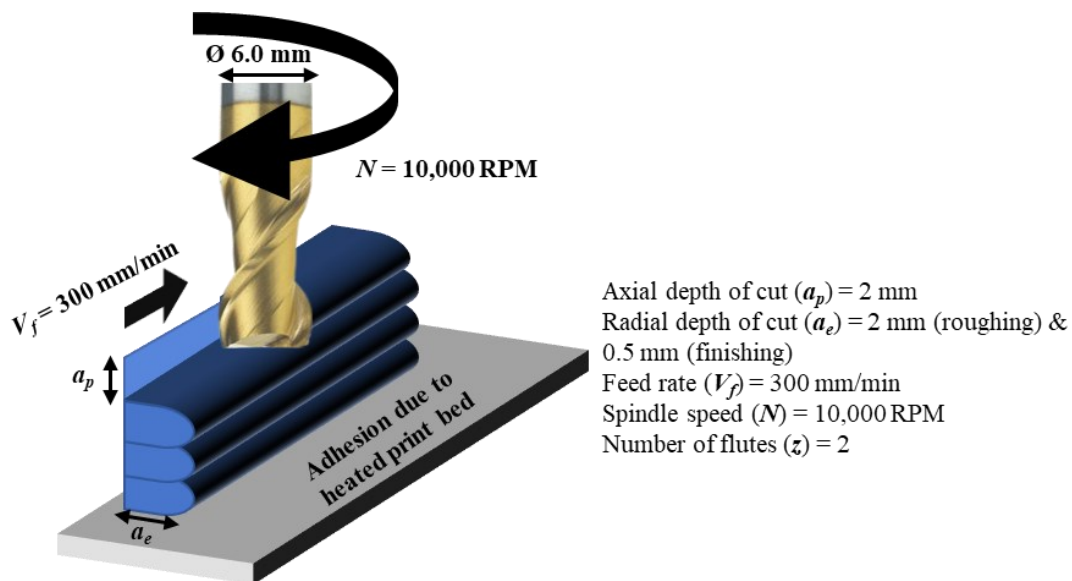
CNC machining parameters used for post-processing the 3D printed wax workpiece
